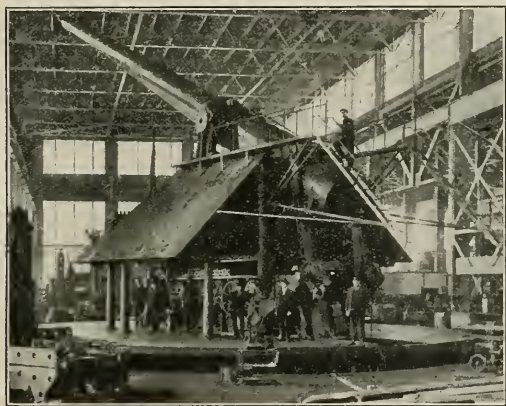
16-IN. DISAPPEARING CARRIAGE, MODEL OF 1917
